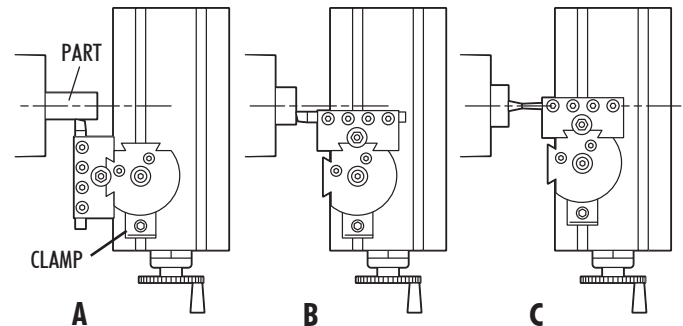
The 1/4" cutting tool can be mounted in either position. Figure A shows the position for cutting and Figure B shows the position for facing. Figure C shows the boring tool positioned to bore the end of a piece of stock.
